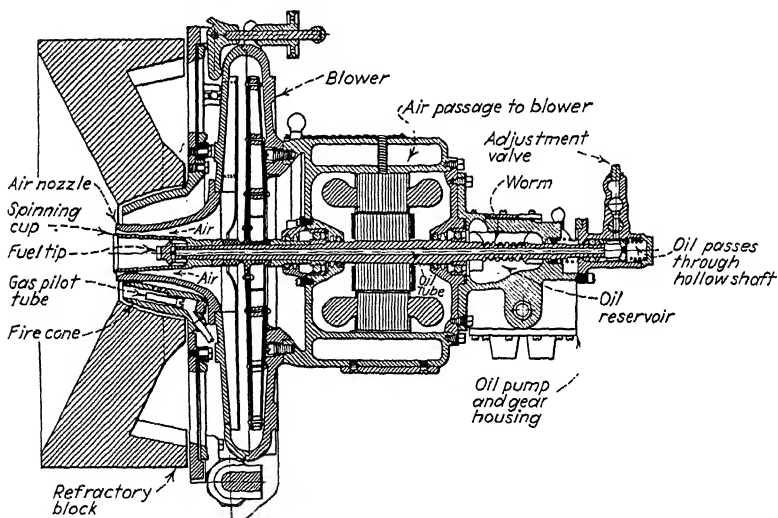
Horizontal-shaft atomizer (cup type) with centrifugal fan.
